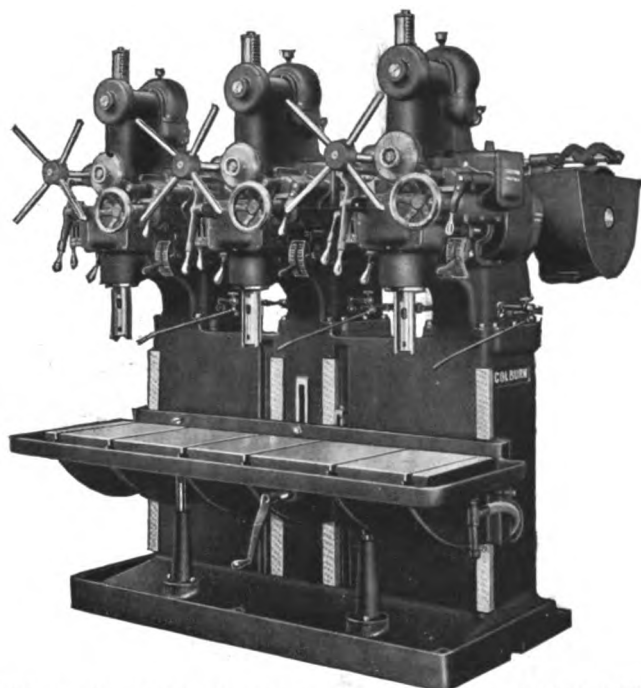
NO. 14 "STANDARD" THREE SPINDLE HEAVY DUTY DRILL PRESS
